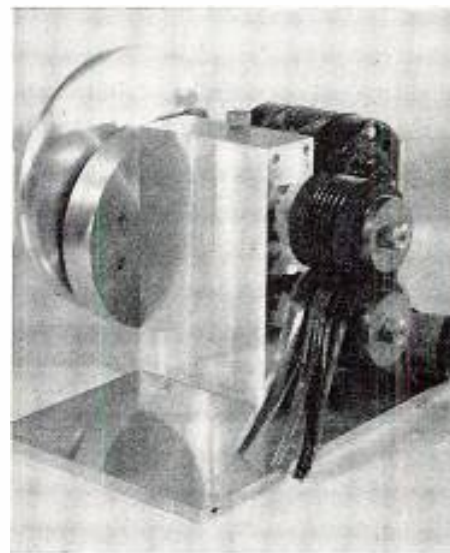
PRECISION TAPE-SLITTING MACHINE
